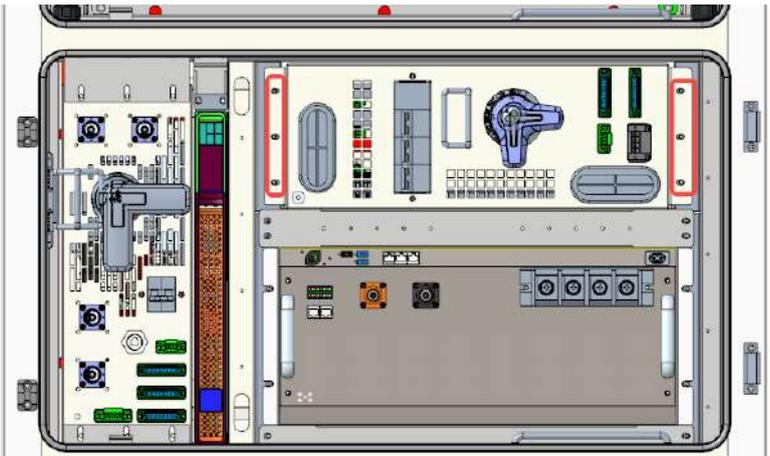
42 Front protective plate of the circuit breaker assembly
